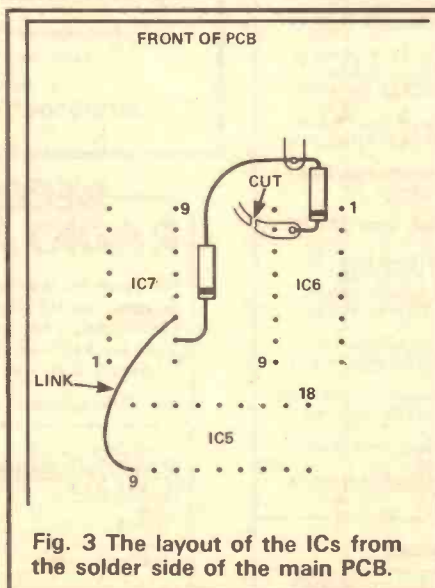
The layout of the ICs from the solder side of the main PCB.
